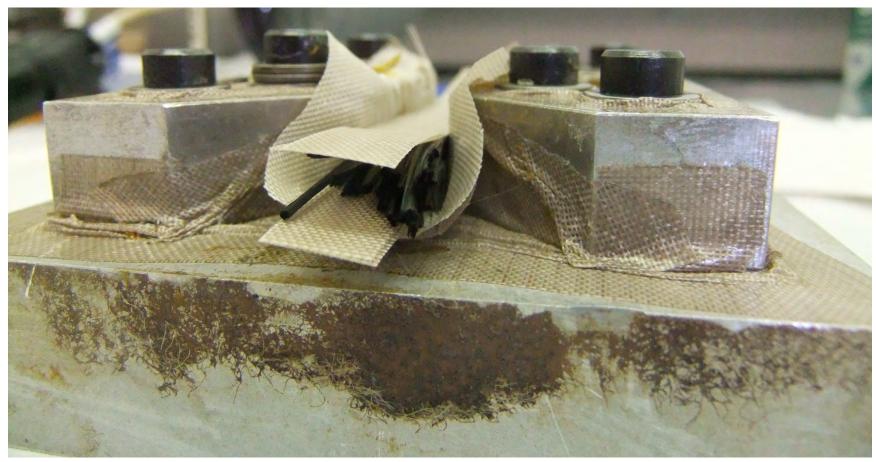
, Top Tooling Plate Bleed Plies Insertion Side View
